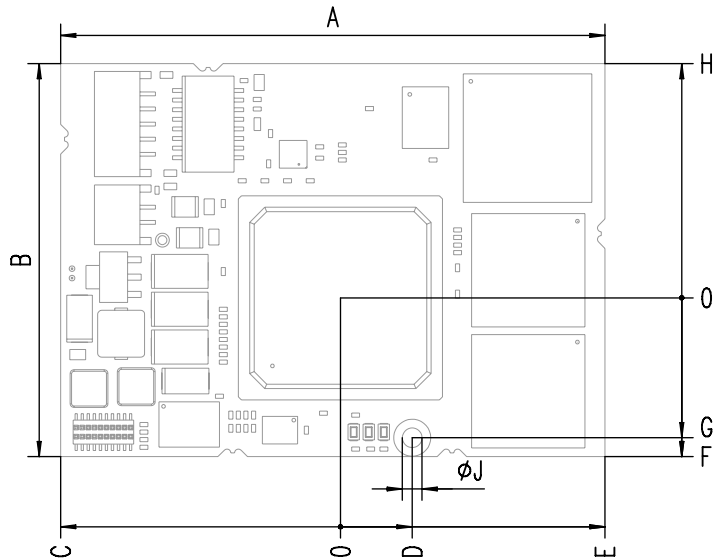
ETK-T2.1D Dimensions - Top View
